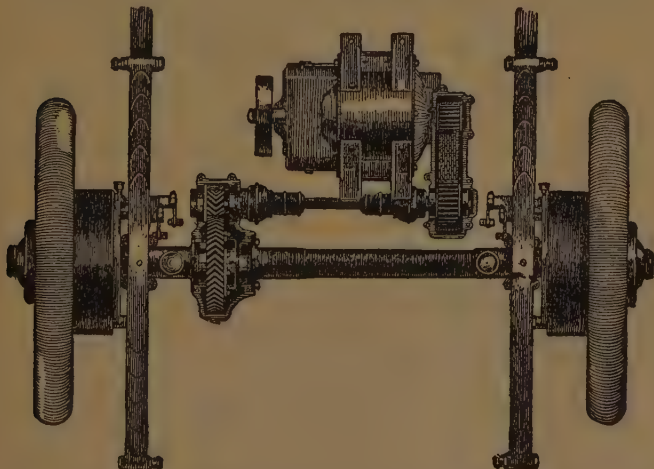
,070.—Waverly double reduction gear or combination herringbone gear and "silent" chain. *In construction* the motor shaft is parallel to the intermediate or jack shaft and drive shaft. Two universal joints are used, so as to give freedom of motion in any direction. The motor weight is above the springs. The first reduction is by the silent chain enclosed in a casing at end of motor; the second reduction is through the herringbone gear in the axle.
